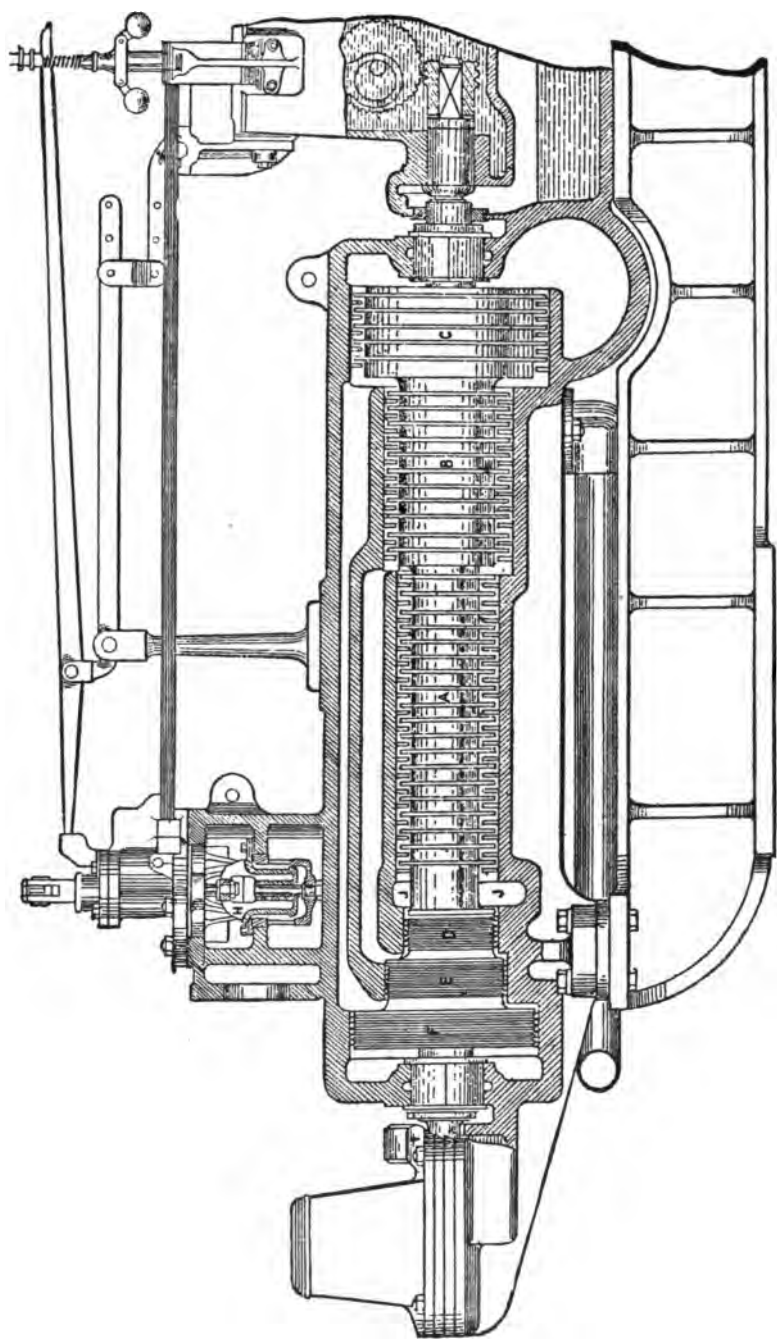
Section of Parsons Parallel-flow Turbine.
